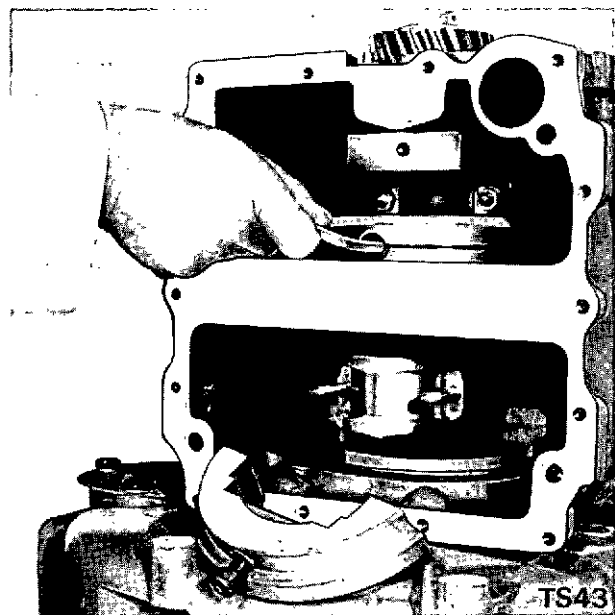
Removing Cylinder, Piston and Connecting Rod
